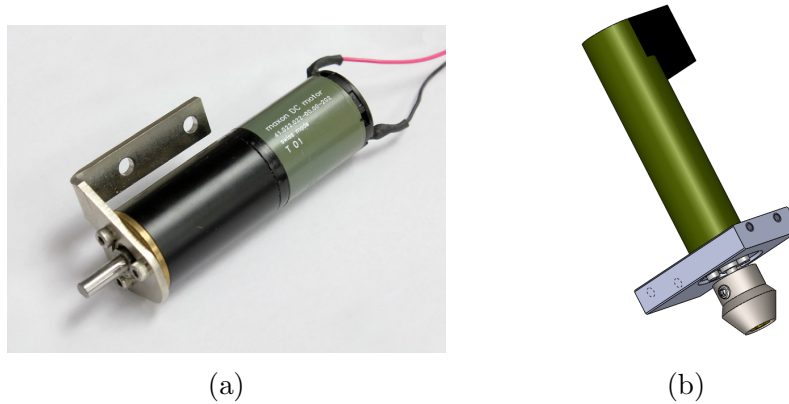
Illustrations of the motor and its connection: (a) the Swiss Maxon DC motor and (b) the CAD model to illustrate the connection of the motor, aluminum plate and bevel pinion.
